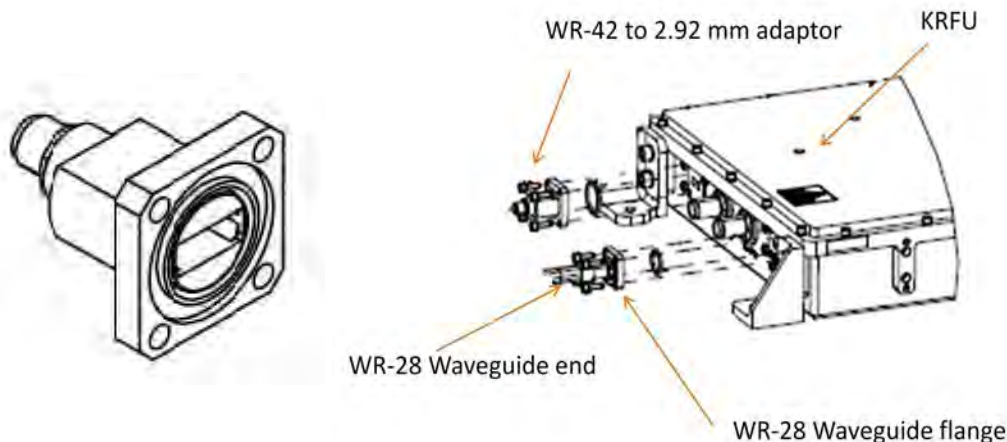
WR42 Waveguide to 2.92 mm Coaxial Connector Adapter
